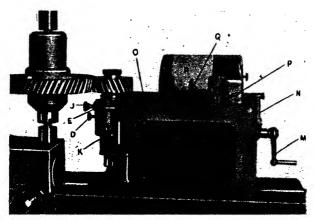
"20 M" TESTER (CLOSE VIEW)
